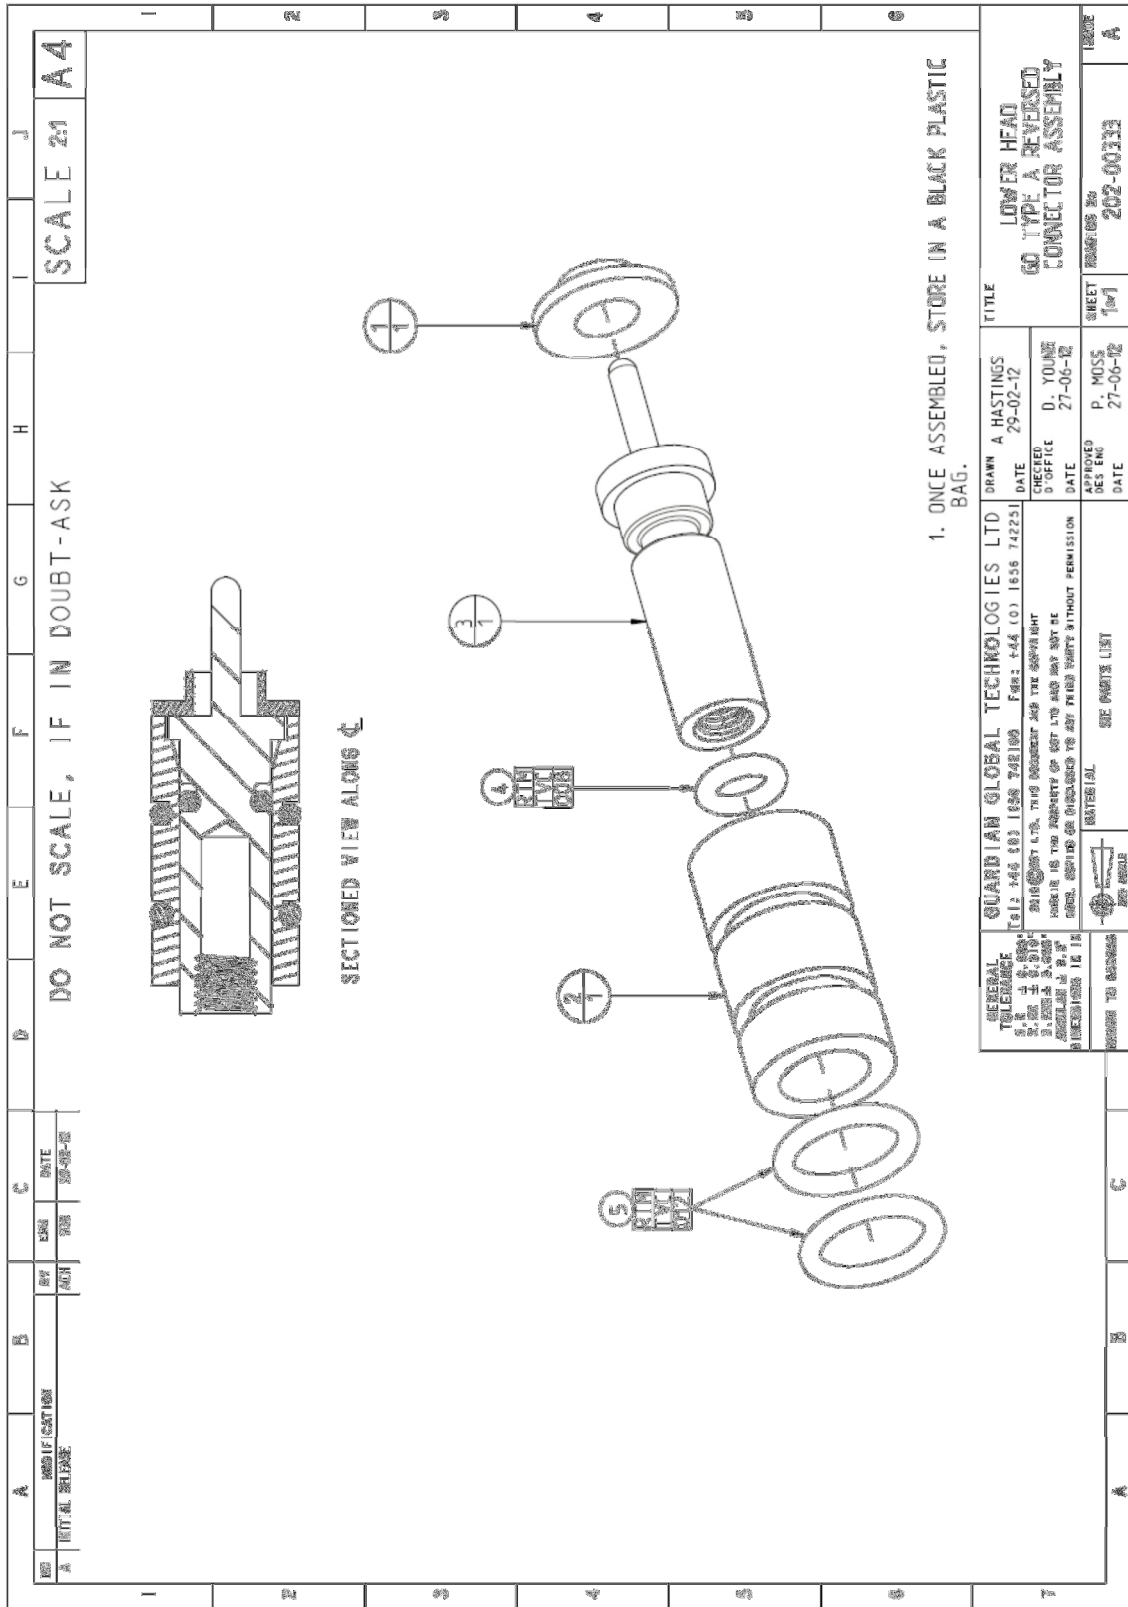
Lower Head GO Type A Reversed Connector Assembly Drawing, 202-00333-A
